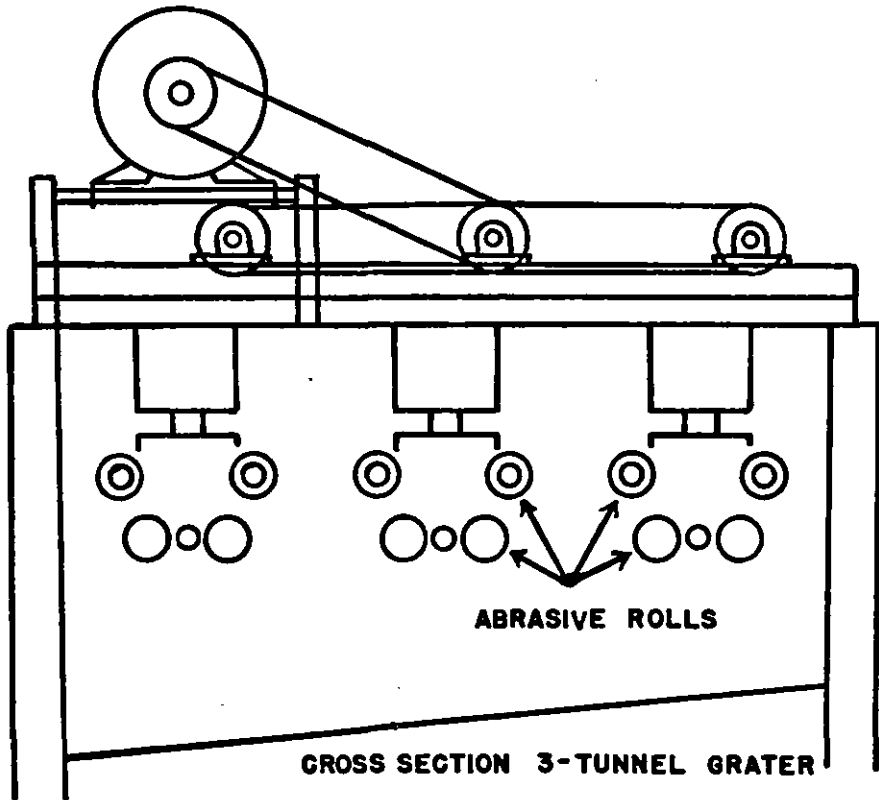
Cross-section diagram of Fraser Brace extractor. (Courtesy Fraser Brace Engineering Co., Tampa.)
